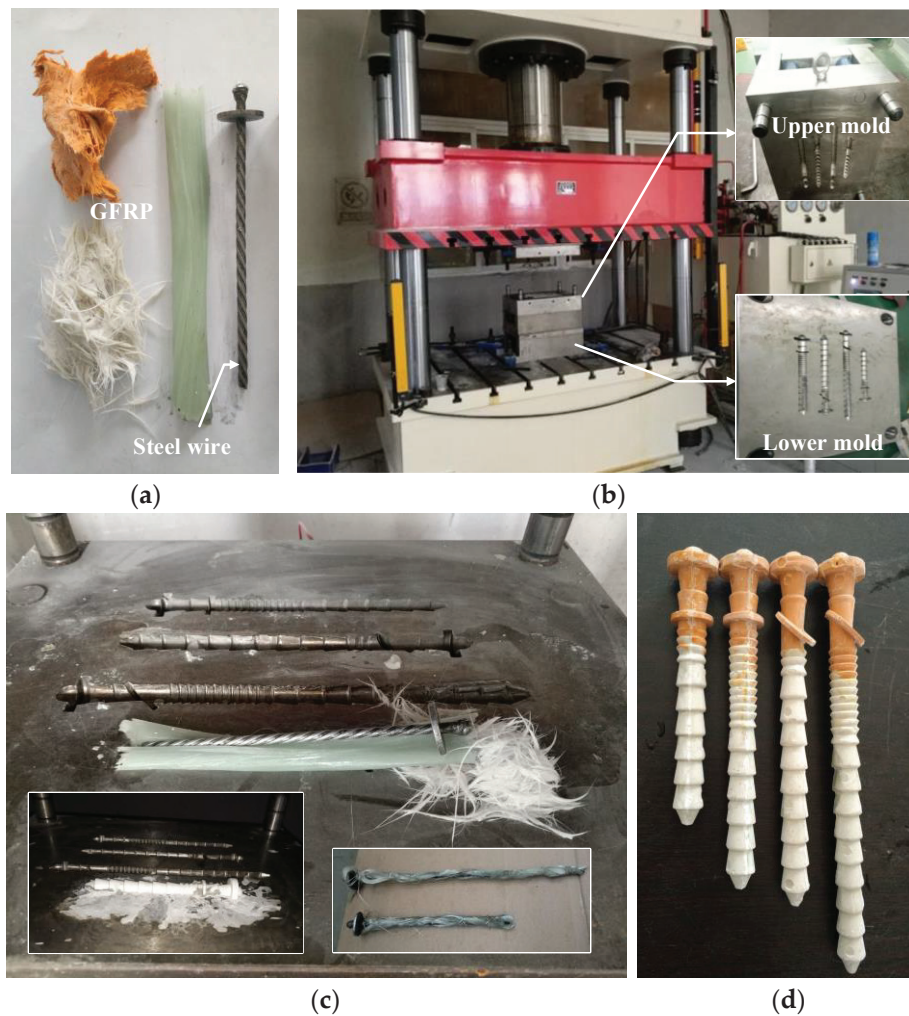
The preparation process of SGCCs: (a) Raw materials; (b) 315T hydraulic press equipment and molds; (c) Filling, molding, forming and demolding; (d) Physical photo of SGCCs.
